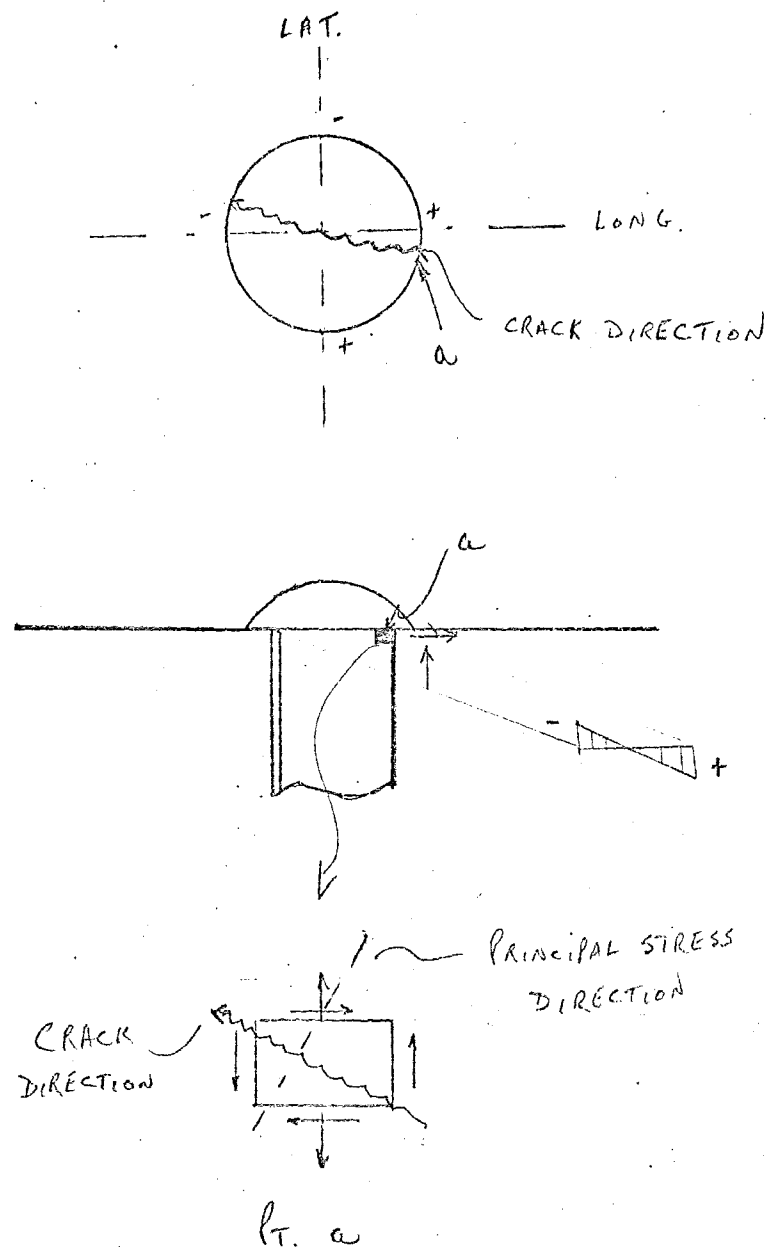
Cause of Crack Growth into Head of Tieplate Rivet
